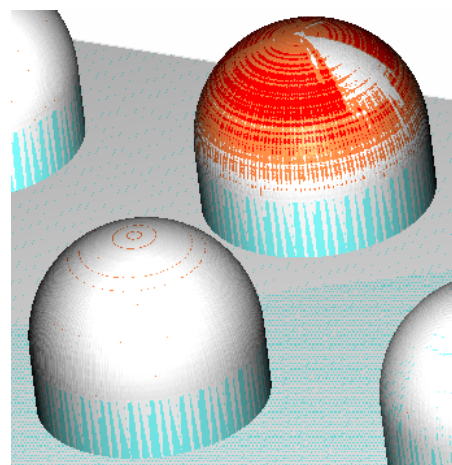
Comparison of the machined surfaces made by Radial strategy - bottom 3-axis, top 5-axis milling
